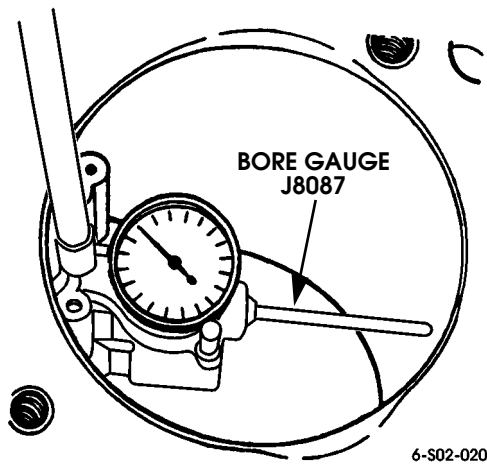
Measuring Cylinder Taper and Wear with Bore Gauge
